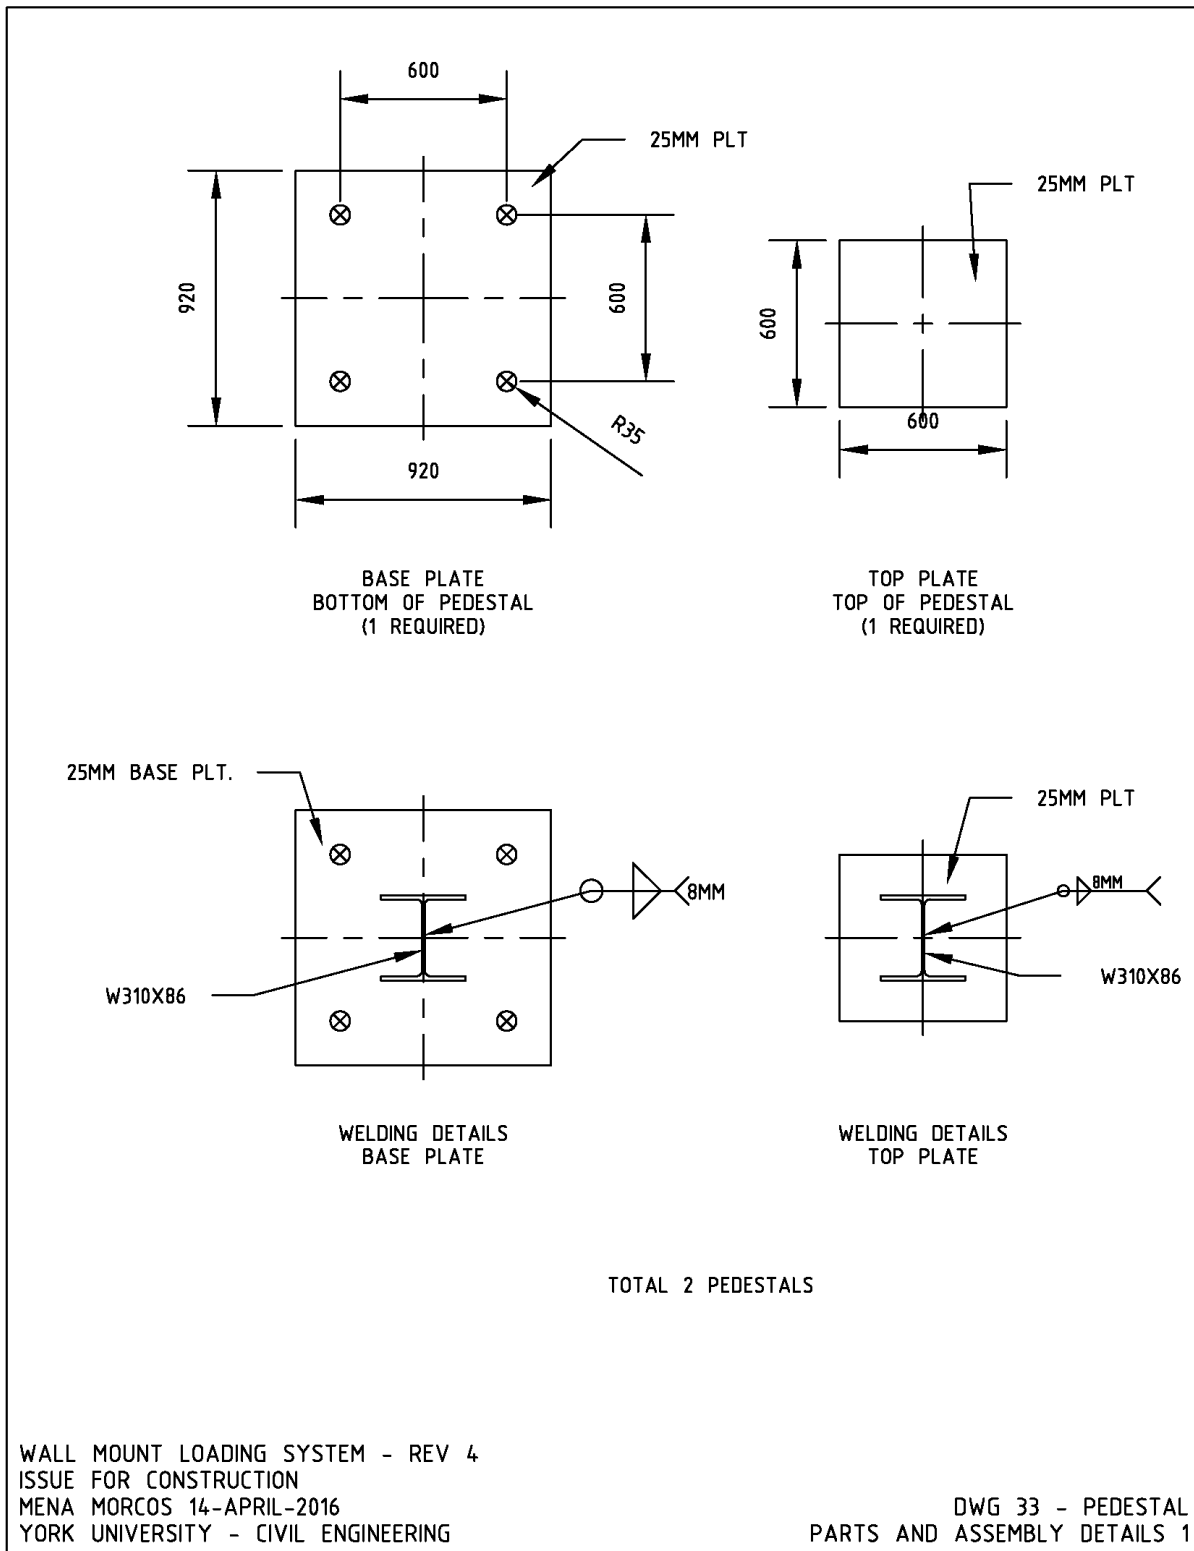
Wall mount loading system design and fabrication drawing – Drawing 33.
